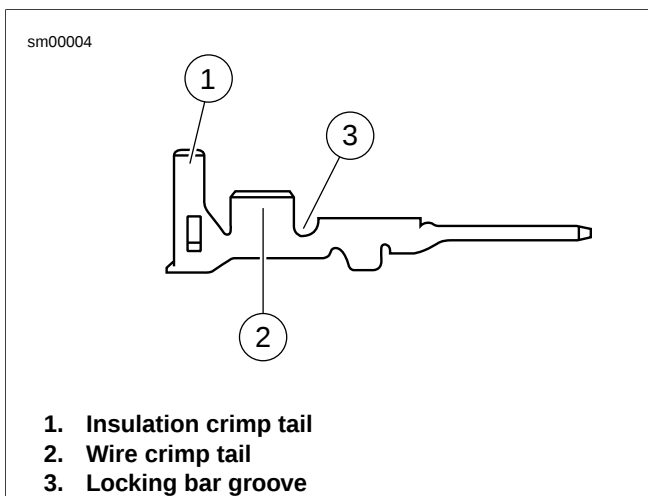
Tyco 070 Multilock Unsealed Connector: Pin Terminal
